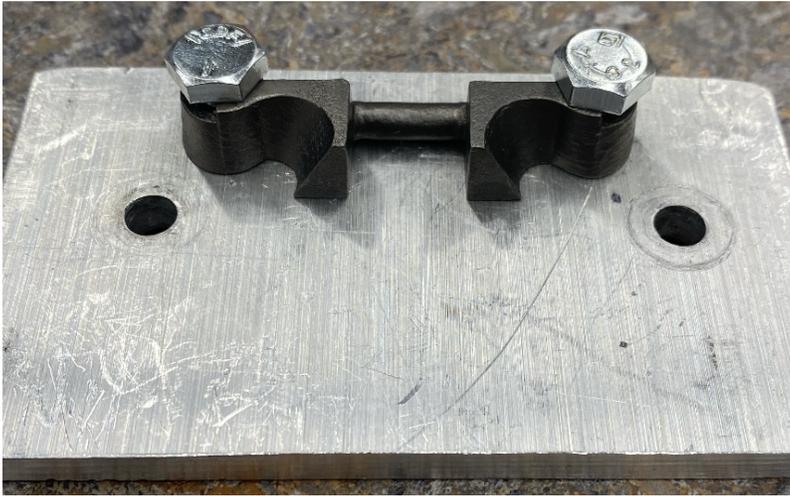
Lower compression plate with 2 1/4 inch-20 bolts to keep the incline plane fastened to the plate
